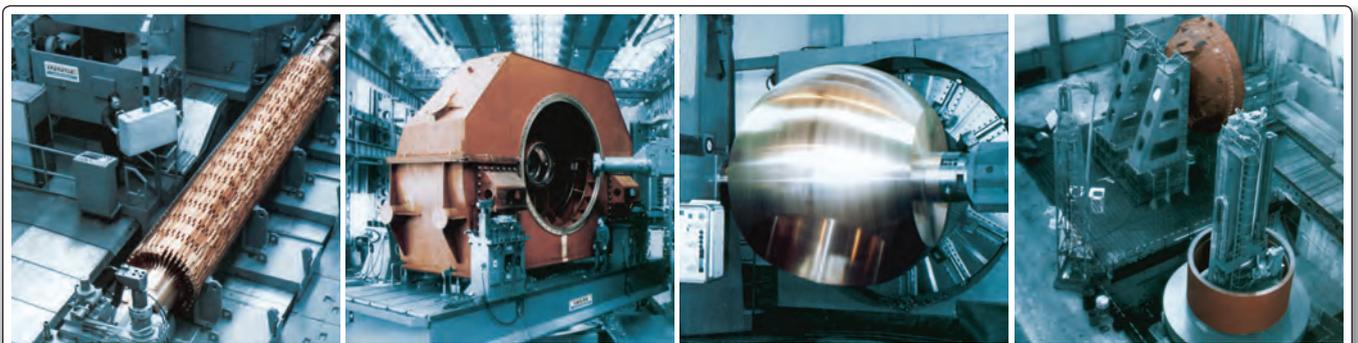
Examples of predominantly rotary workpieces manufactured by heavy CNC machines [Innse – Berardi – Retco]
